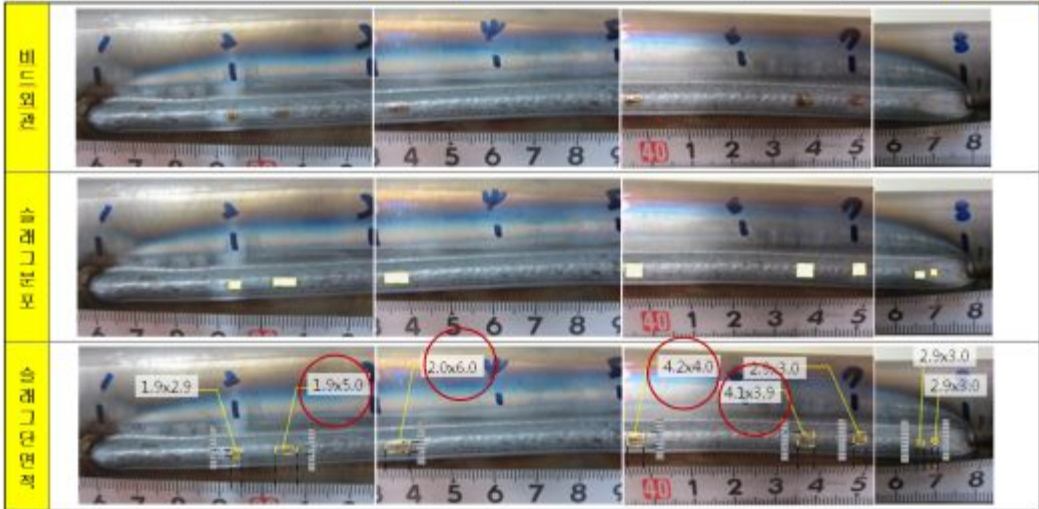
Dynamic-3.0%, Back step welding
